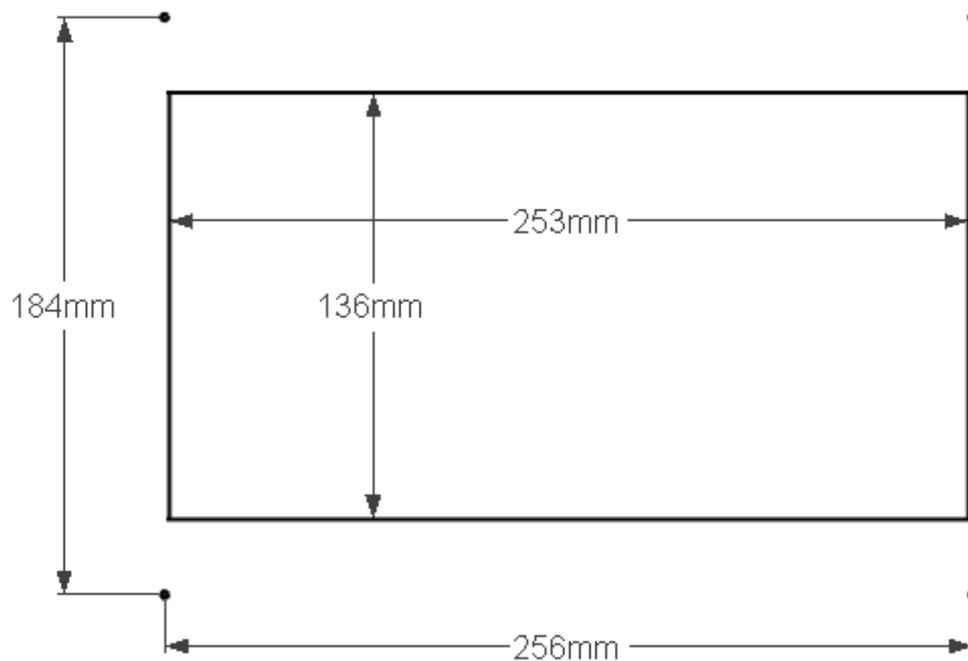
R5 SUPREME CDU, Cut-out Measurements for Panel Flush Mount (mm)
